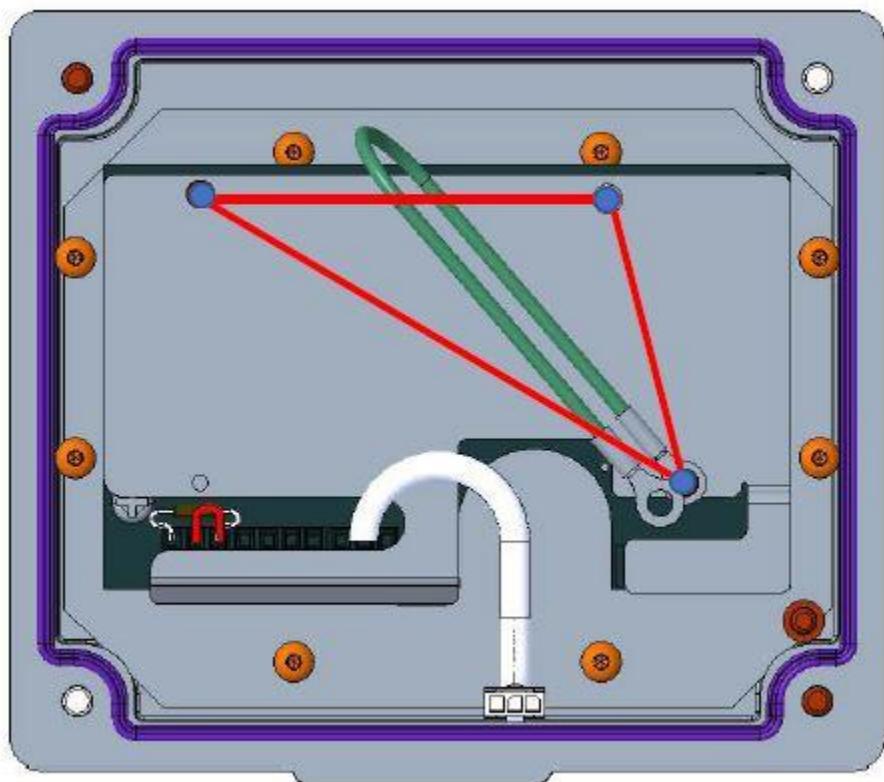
PCB plate sealing configuration / Configuration de scellage de la plaque PCB
